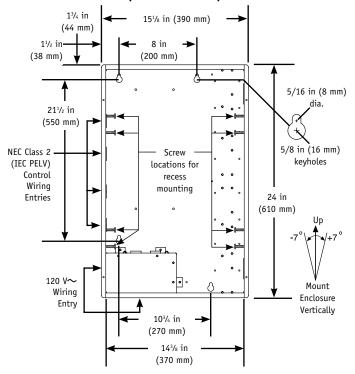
Dimensions and Mounting (HWI-LV24-120)
